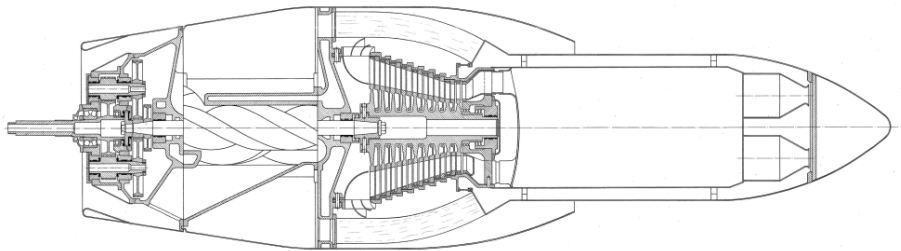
Early integration of twin screw machine in Gas Turbine aircraft engine.
